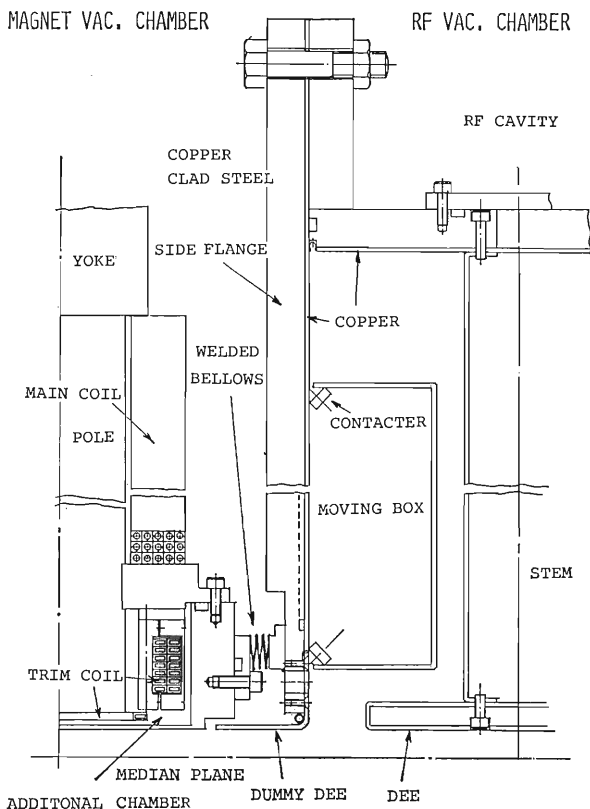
Sealing method which uses the side flange with welded bellows between magnet and RF chamber.
